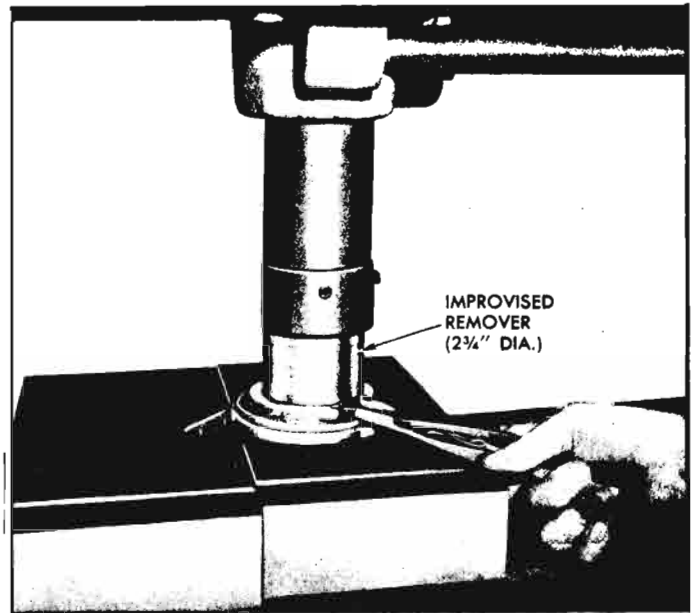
D-41—Pressing Rear Bearing from Bearing Retainer
